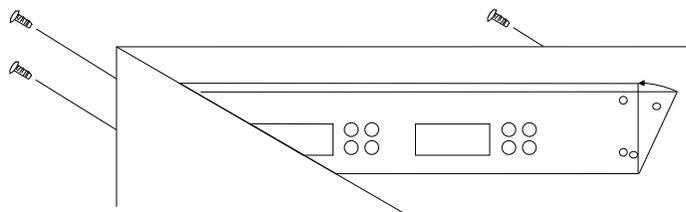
Installing "standard" line card face plate (view from inside chassis)
